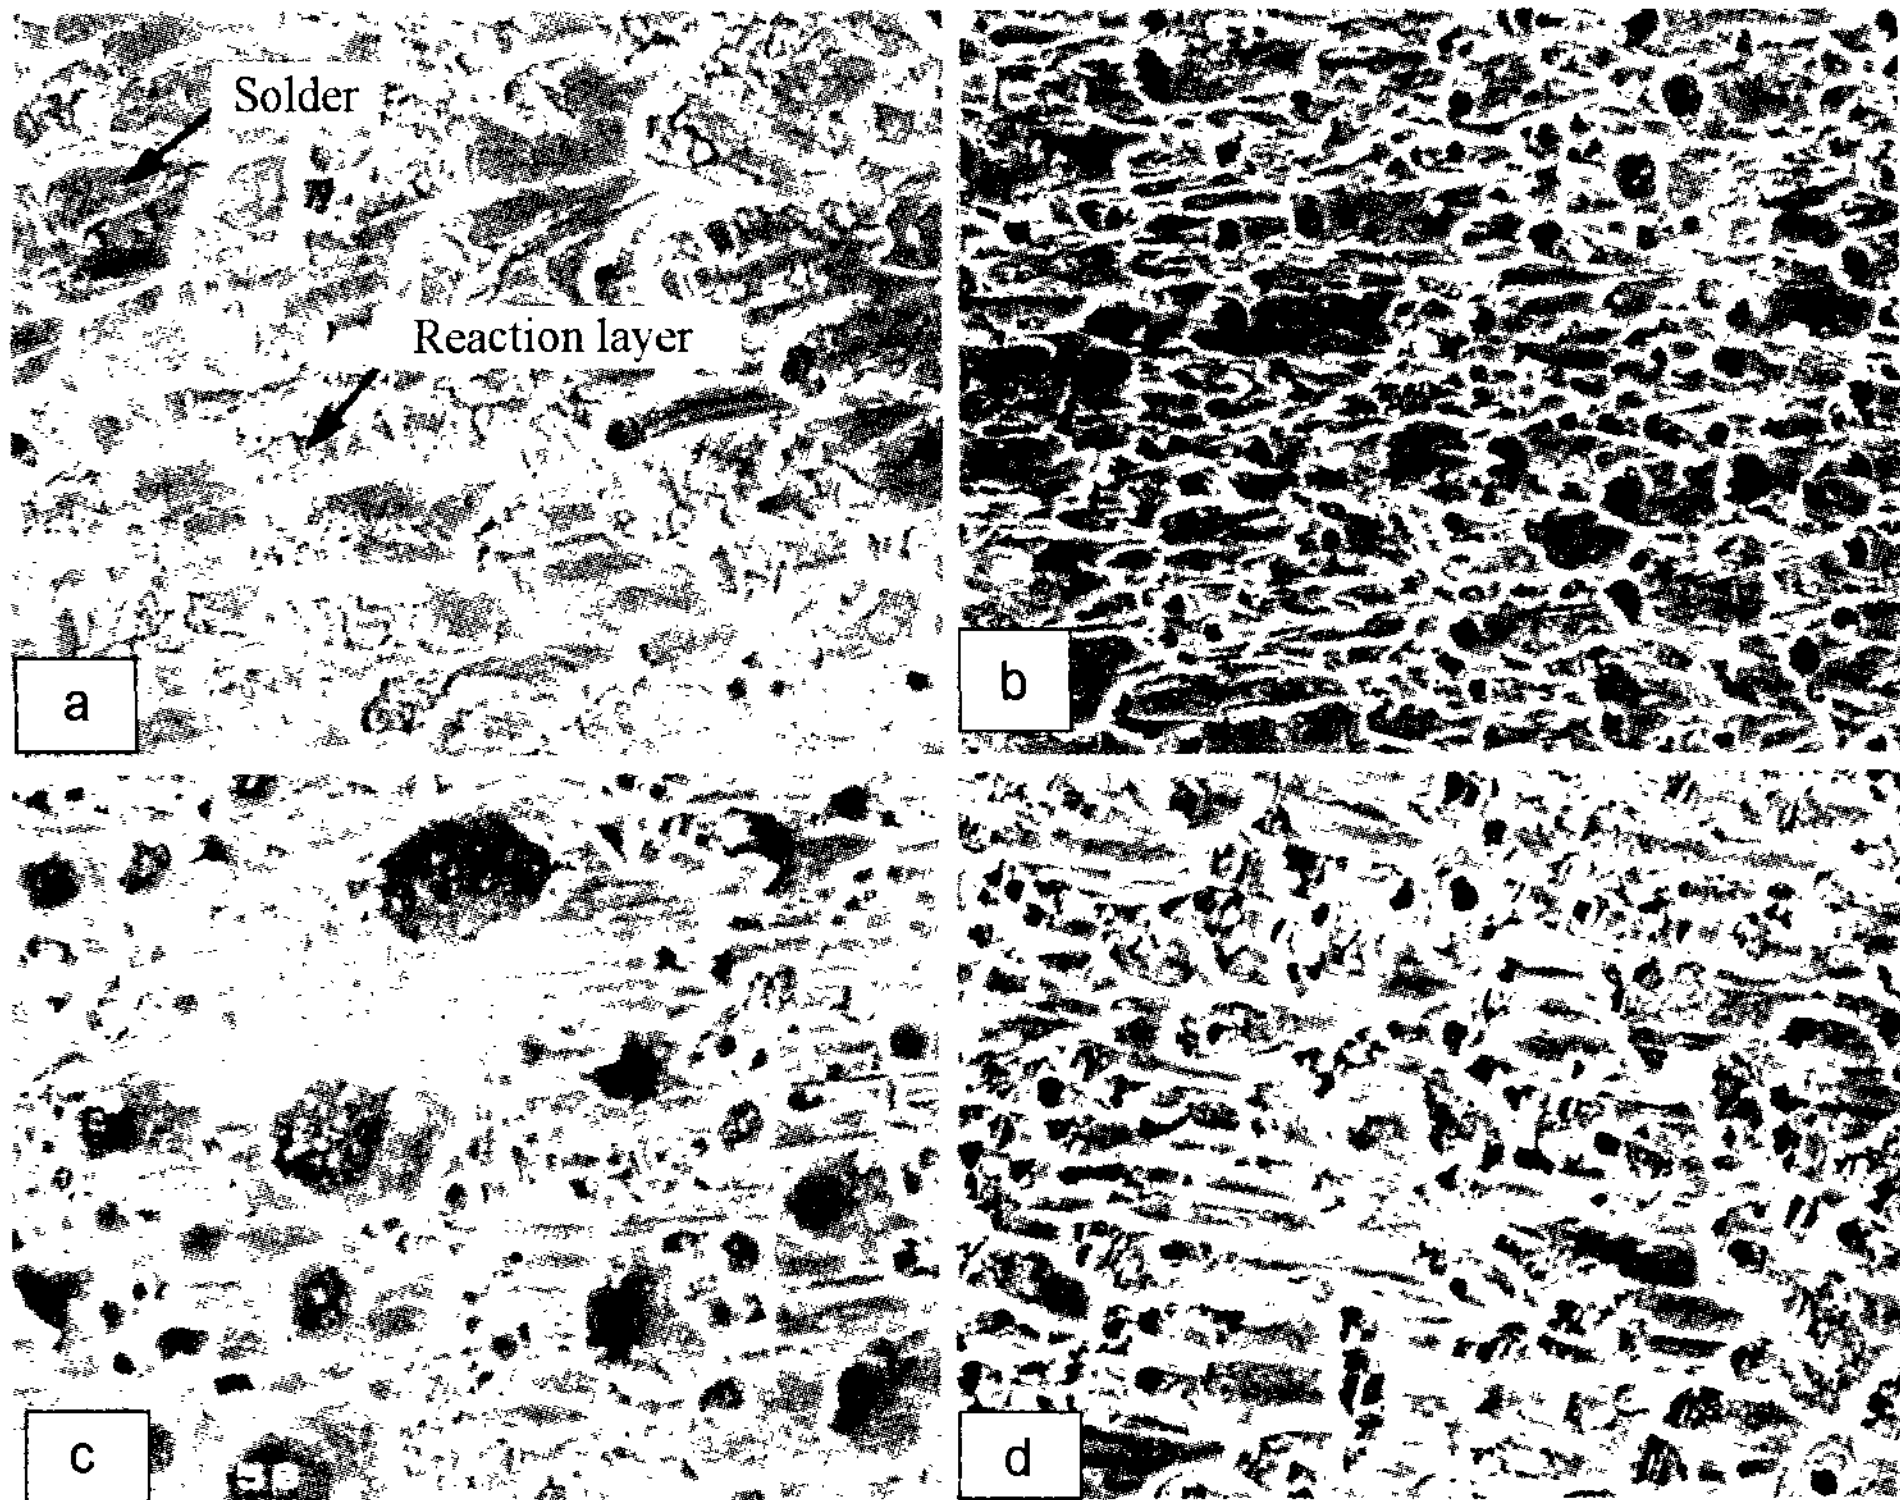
Fractographs of solder/Cu joint after shear test. Sn-3.5Ag/Cu(a, b) and Sn-3.1Ag-6.9Bi/Cu(c, d).
